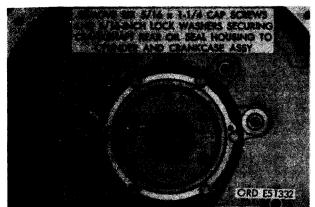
REMOVING OR INSTALLING CRANKSHAFT REAR OIL SEAL AND HOUSING ASSEMBLY CAP SCREWS.
